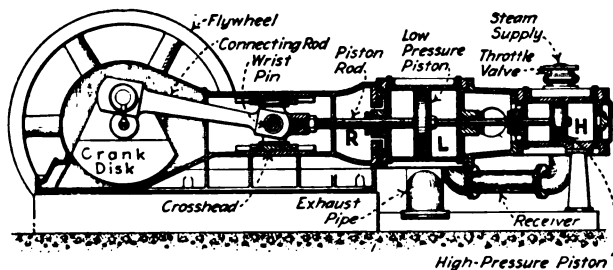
A tandem-compound engine (Ball Engine Company).
